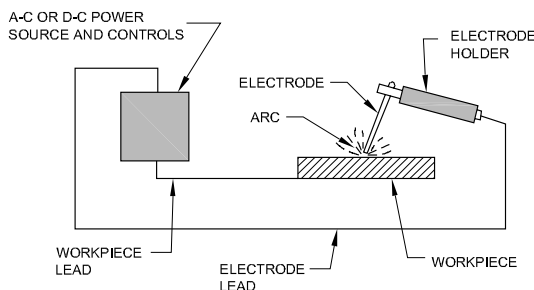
Elements of a typical welding circuit for shield metal arc welding
